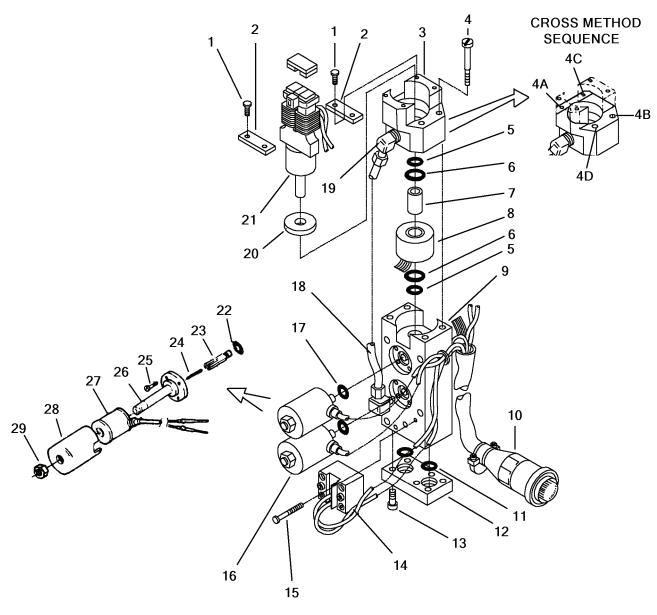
OCM Sampling/Sensor Assembly (Sheet 3 of 3).
